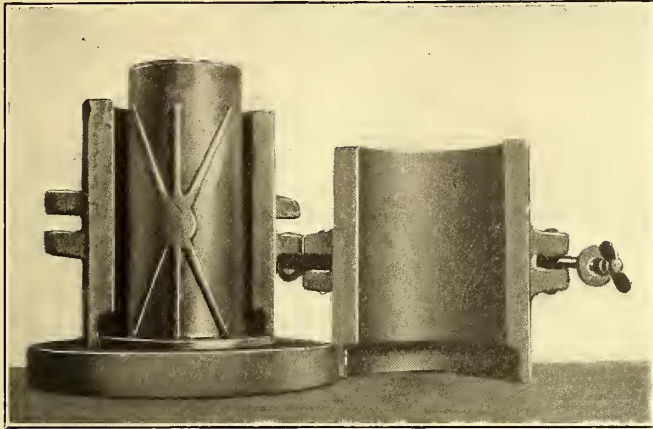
DEVICE FOR BABBITTING SPLIT BEARINGS
